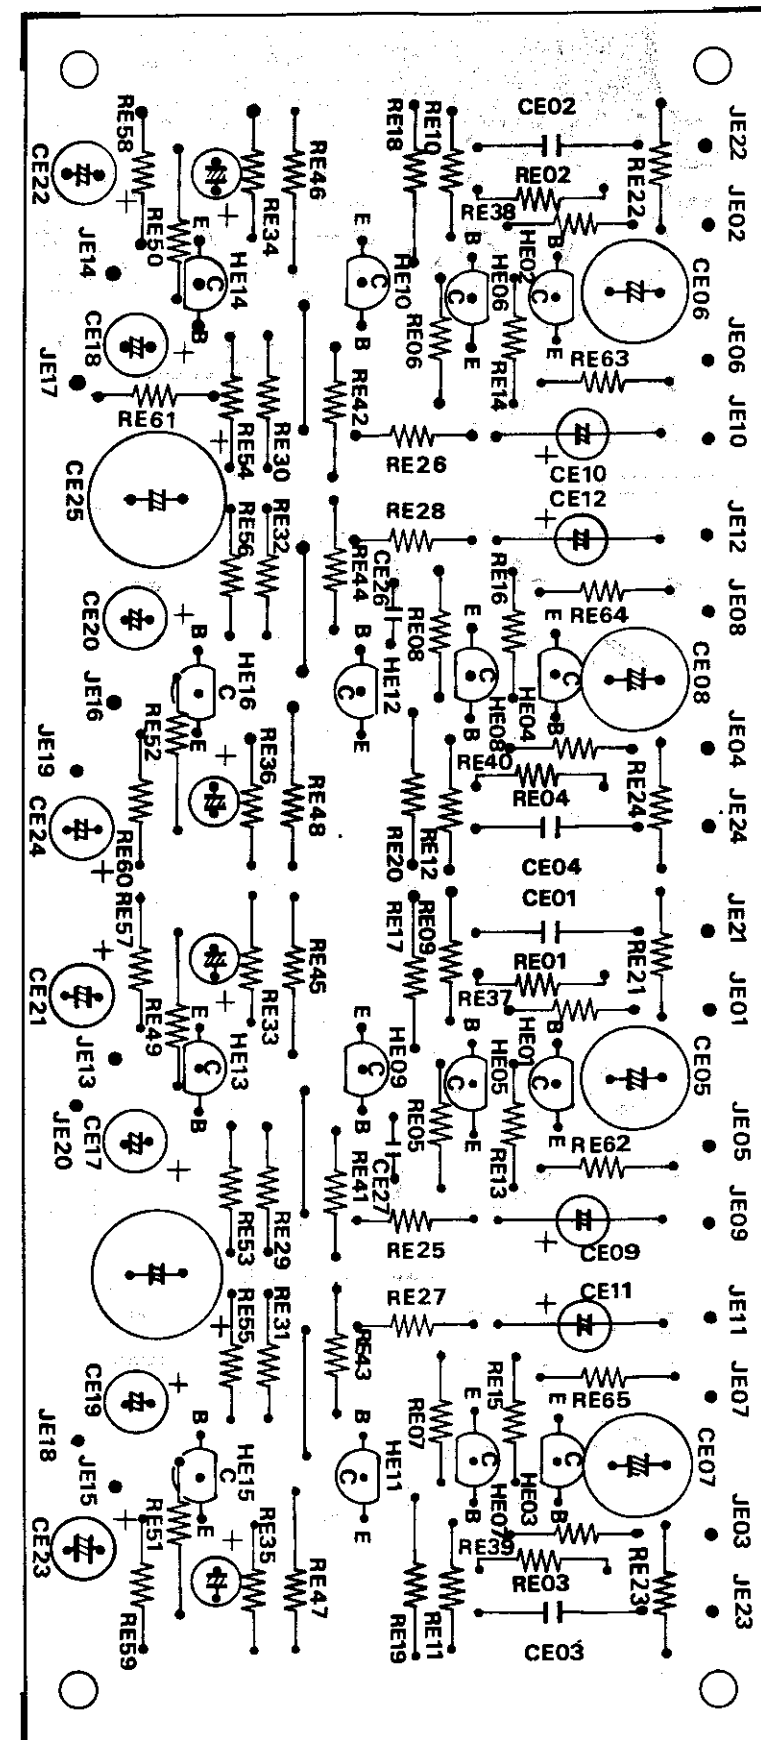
Buffer, Pre-Amplifier Assembly PE01 Component Locations
